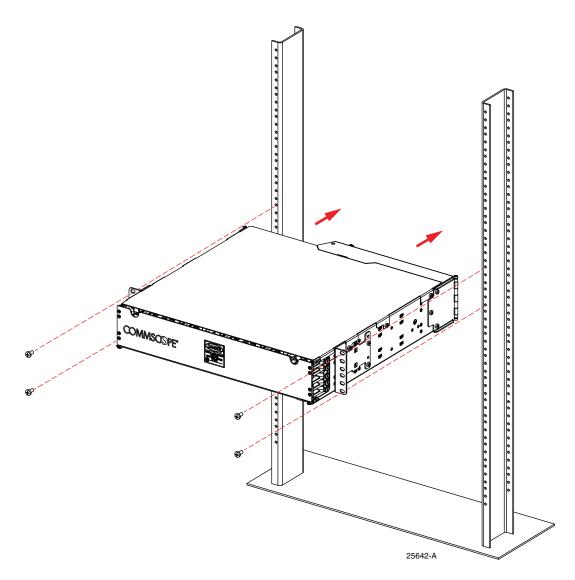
Mounting the Panel on the Equipment Rack (2RU Model Shown)
